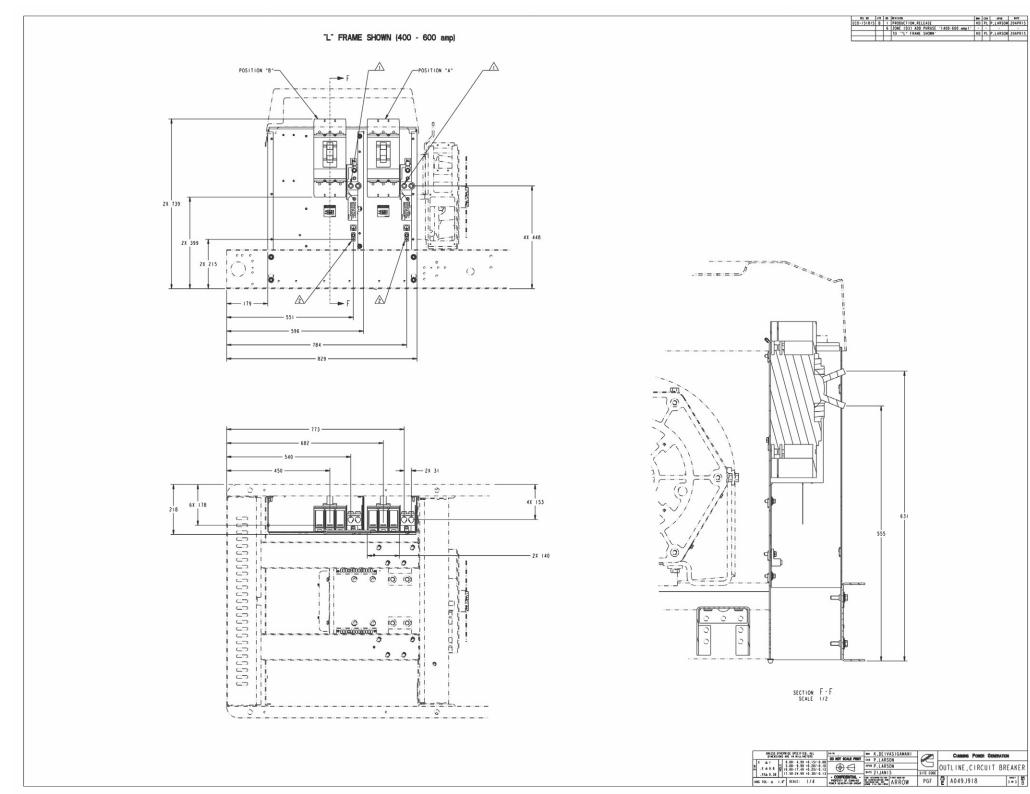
CIRCUIT BREAKER OUTLINE (SHEET 3 OF 3)
